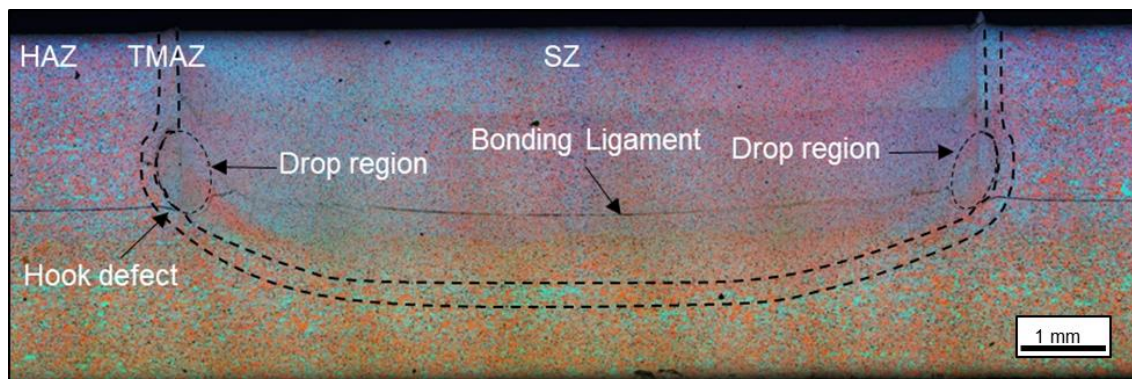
Cross section macrostructure of AA6082-T6 weld produced by RFSSW indicating SZ, TMAZ, HAZ, hook defect, Bonding Ligament and Drop region.
